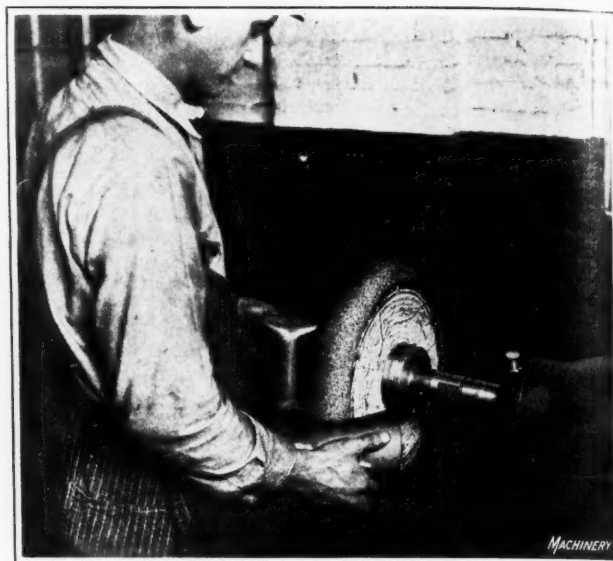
A Formed-face Quilted Polishing Wheel used for polishing the Upright Part of a Sewing Machine Arm
